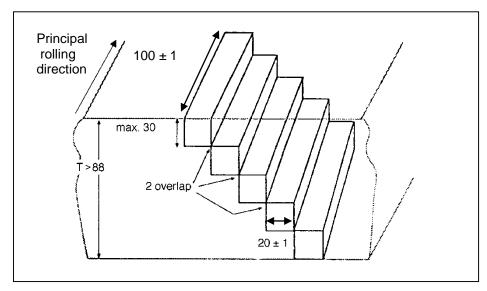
Test Specimen Location for Plates over 88 mm (3.5 in) Thick (All Dimensions in mm [1 in = 25.4 mm])
